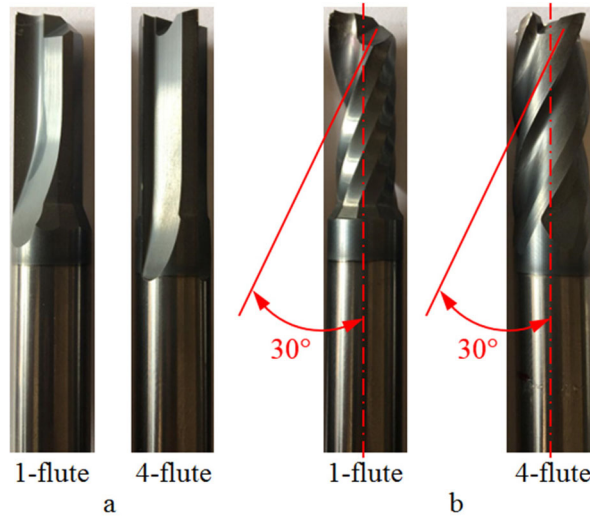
Cutting tools: (a) Straight-flute, (b) Helical-flute.
